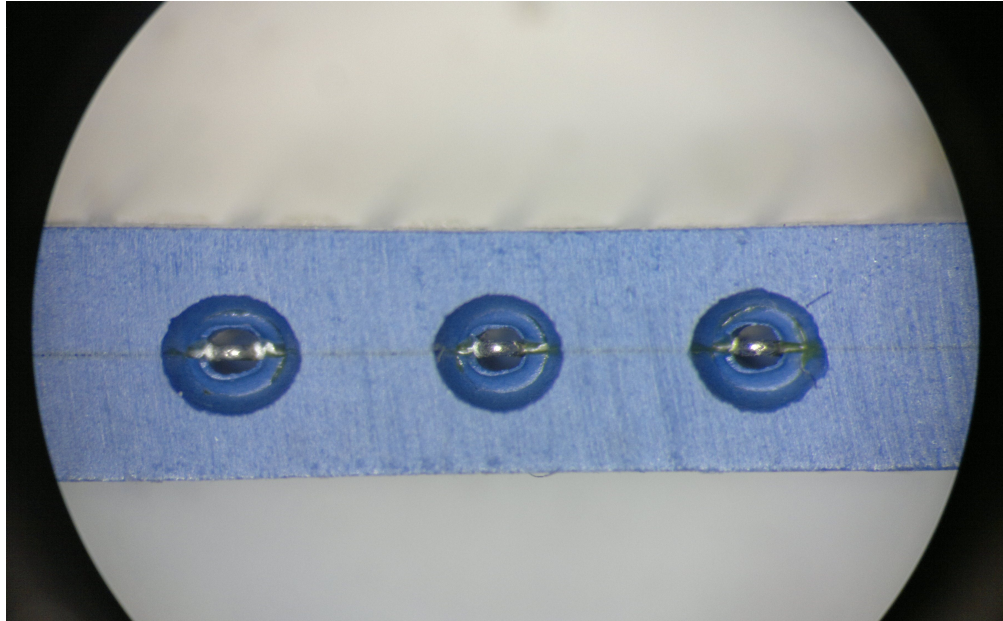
Design D9 after sintering. DPA was performed on this prototype, revealing the broken edges of the capillary tubes due to lack of tolerance for the heating filaments.
